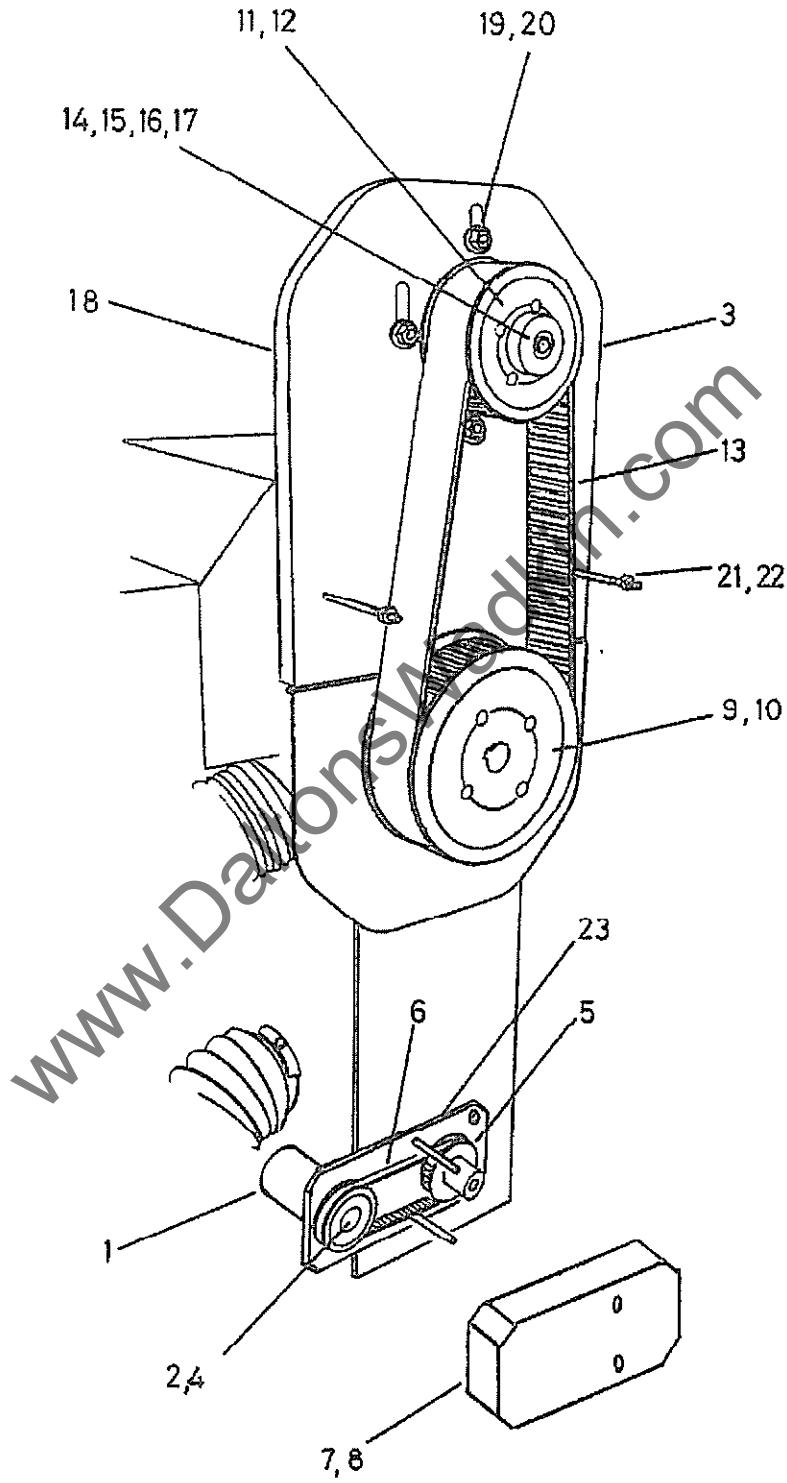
HYDRAULIC DRIVE TRANSFER TO FEED ROLL GEARBOXES
